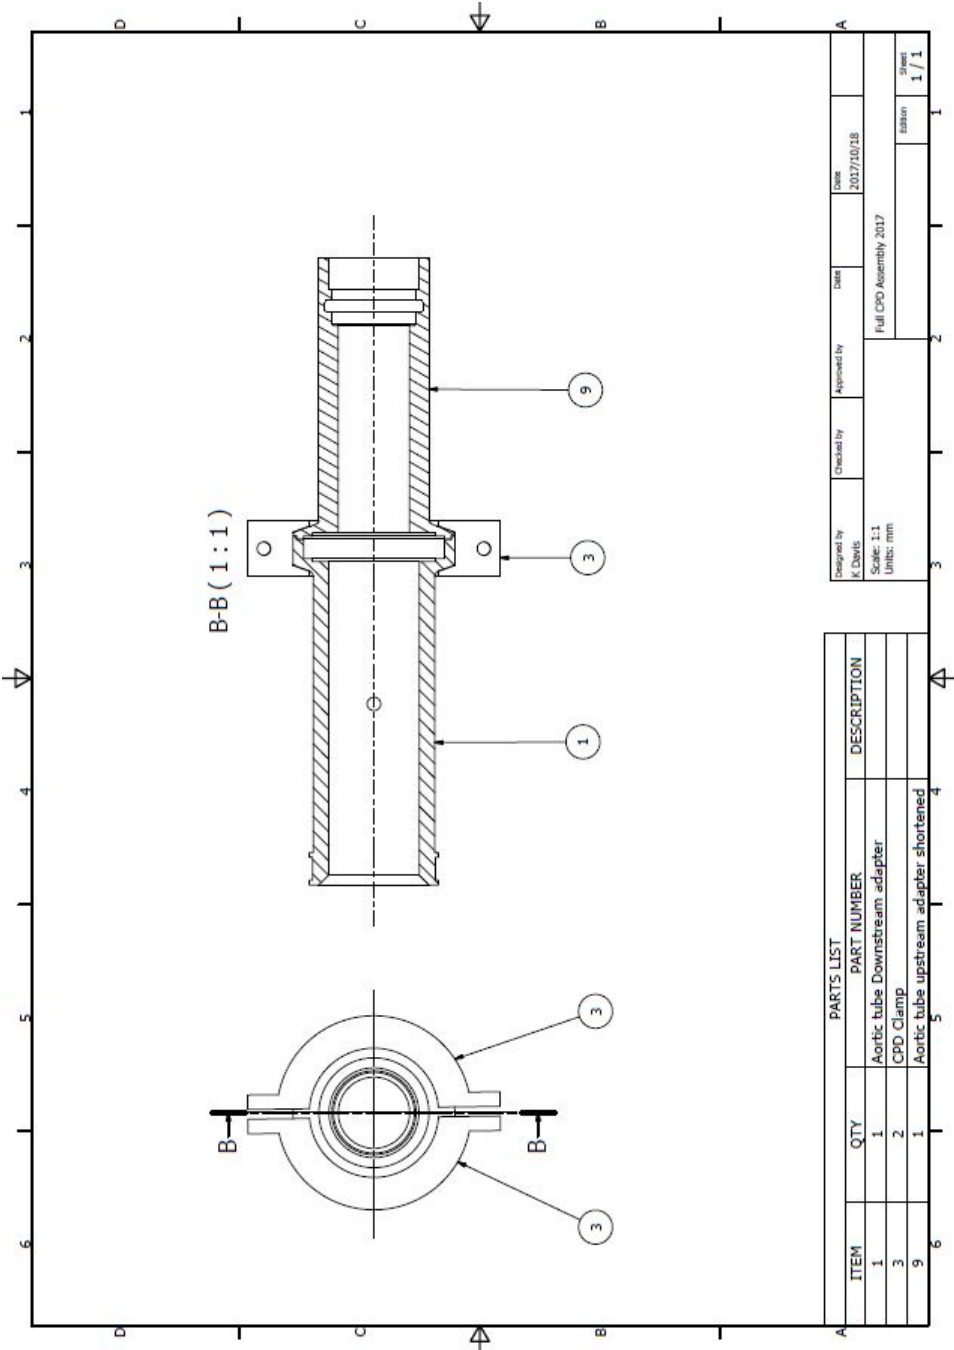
Assembly IDW drawing of the pulse duplication heart valve housing for the PIV experiments
